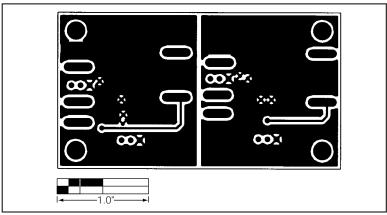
MAX629 EV Kit PC Board Layout—Solder Side
